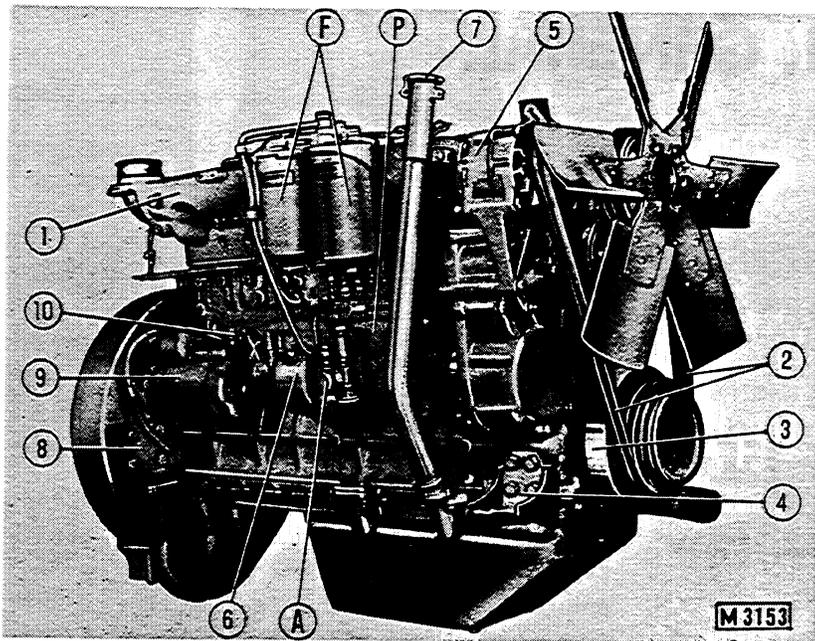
R.H. Side view of engine 8365.05.560 (fitted on crawler loader FL10-C.)
